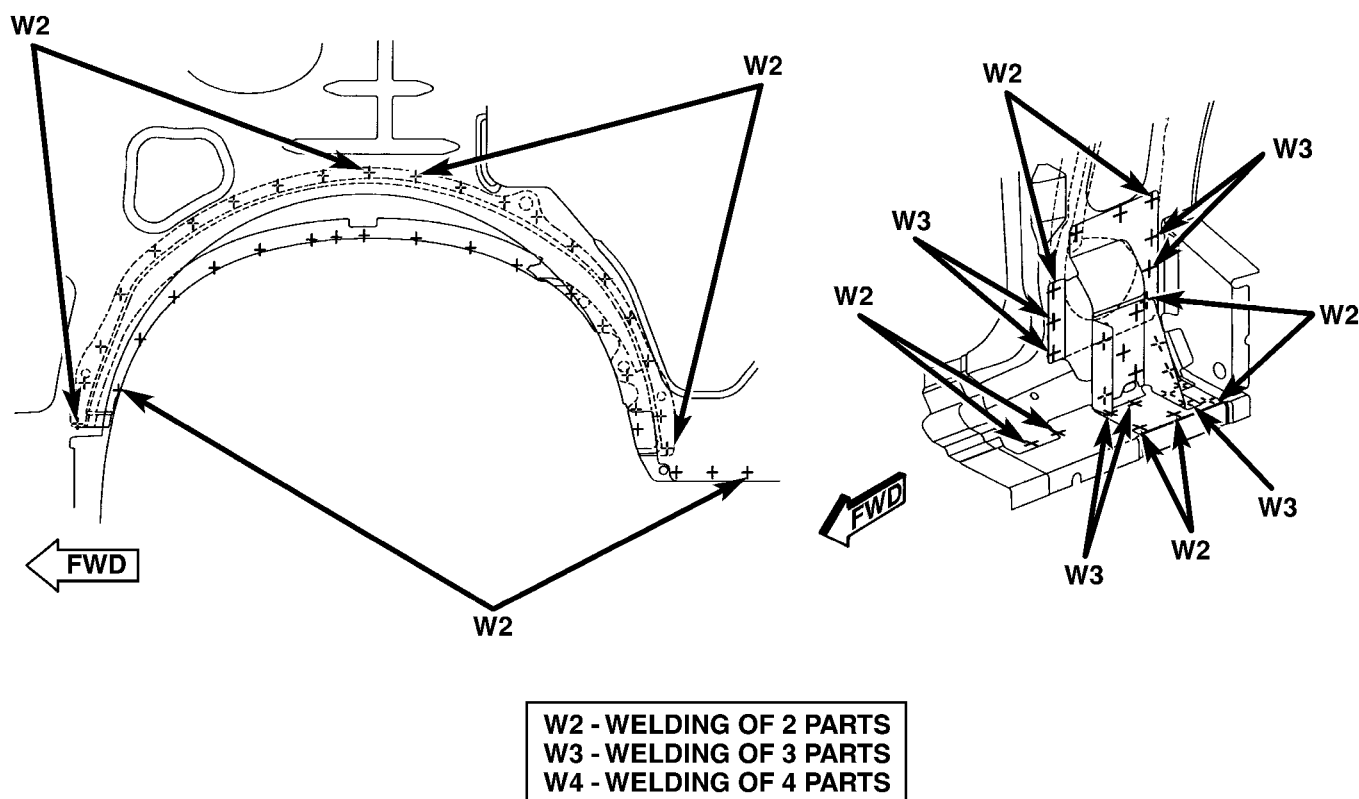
RIGHT REAR INNER QUARTER PANEL - LONG WHEEL BASE ONLY
